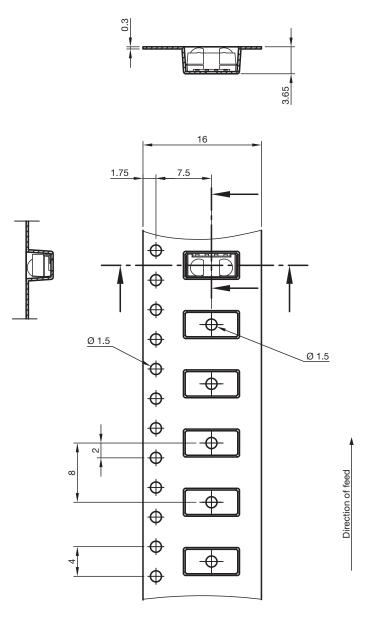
Issue: 2; 06.10.15 technical drawings according to DIN specifications
